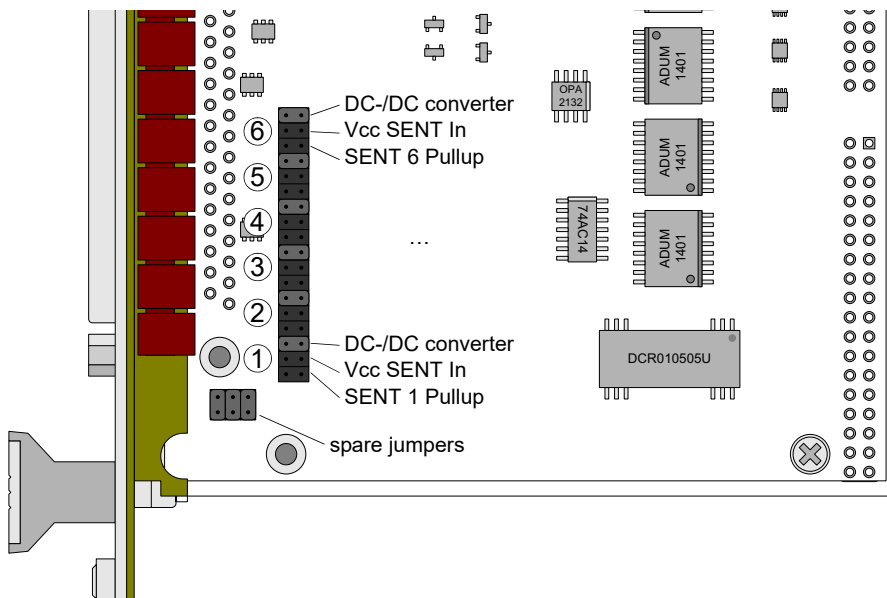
Pro II-SENT-4 Rev. E: Jumper positions on the printed circuit board
